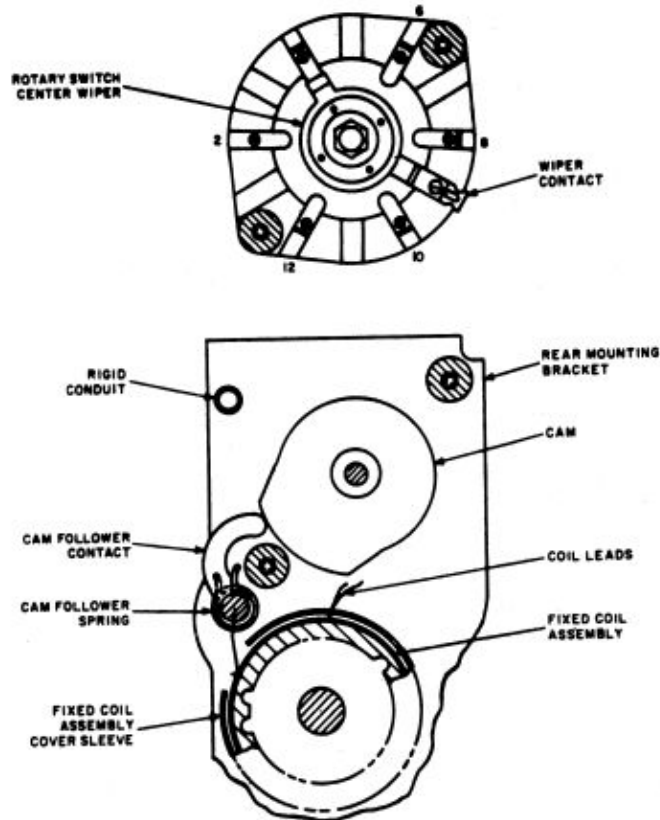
ANTENNA COUPLER ASSEMBLY 2A3, SWITCH-COIL ASSEMBLY DETAILS
